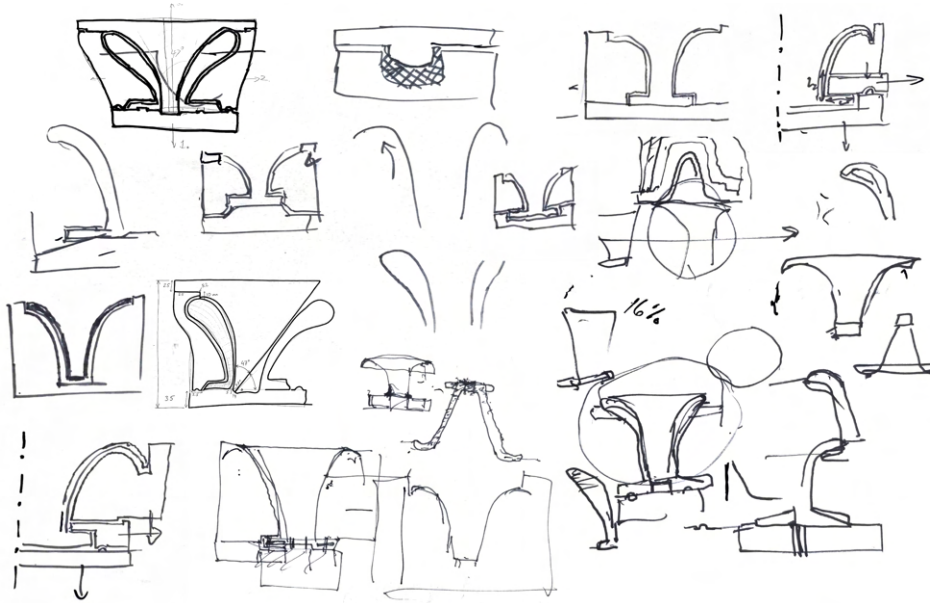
A selection of early sketches exploring horn geometries and mould parting strategies.
